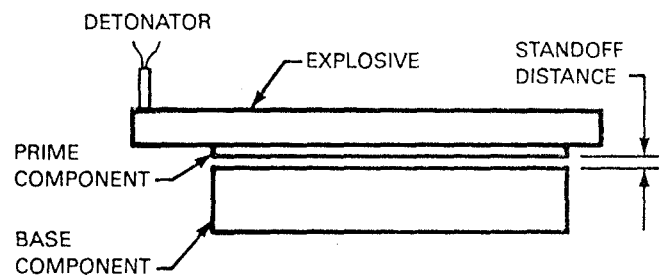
Typical Component Arrangement for Explosion Welding
